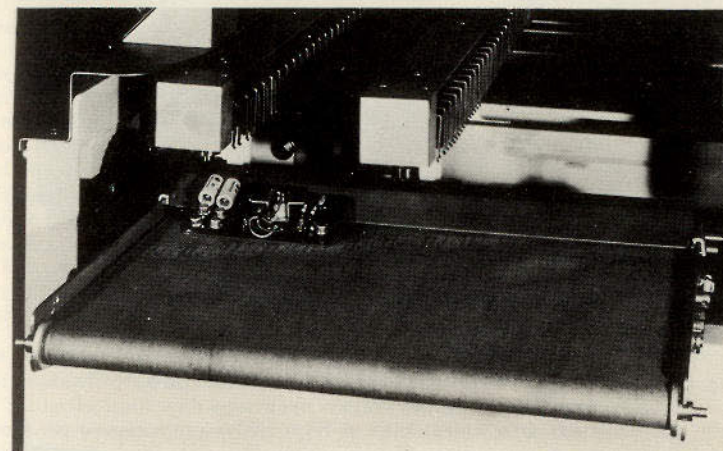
Finger conveyor for holding printed boards in an automated soldering system without the need for pallets. Boards are held in place by the spring tension of conveyor fingers (Electrovert, Inc.).
